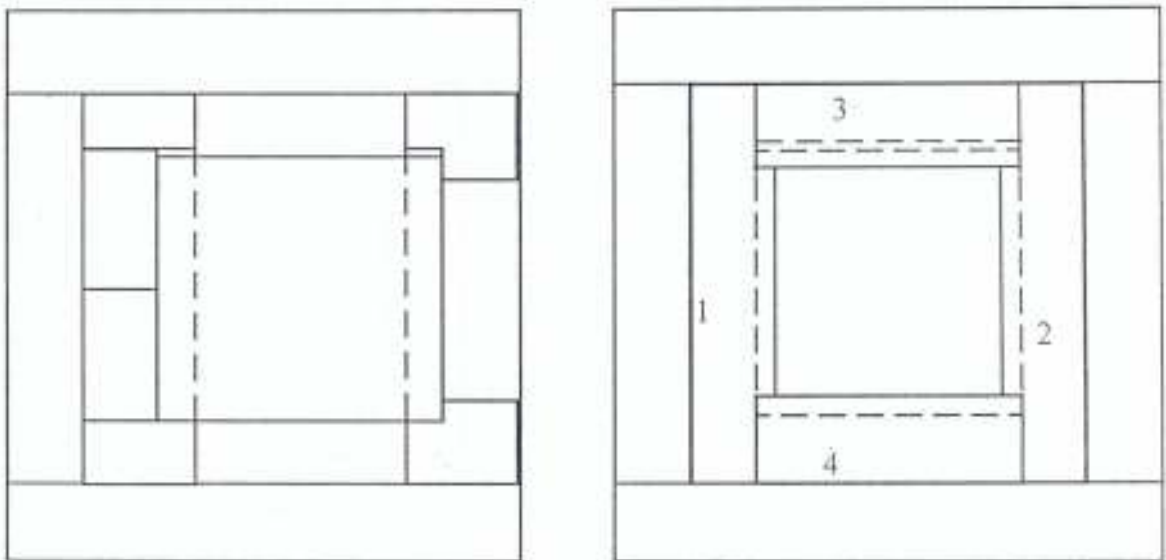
Side and End View of the Final Refractory Assembly (Dimm: mm)
